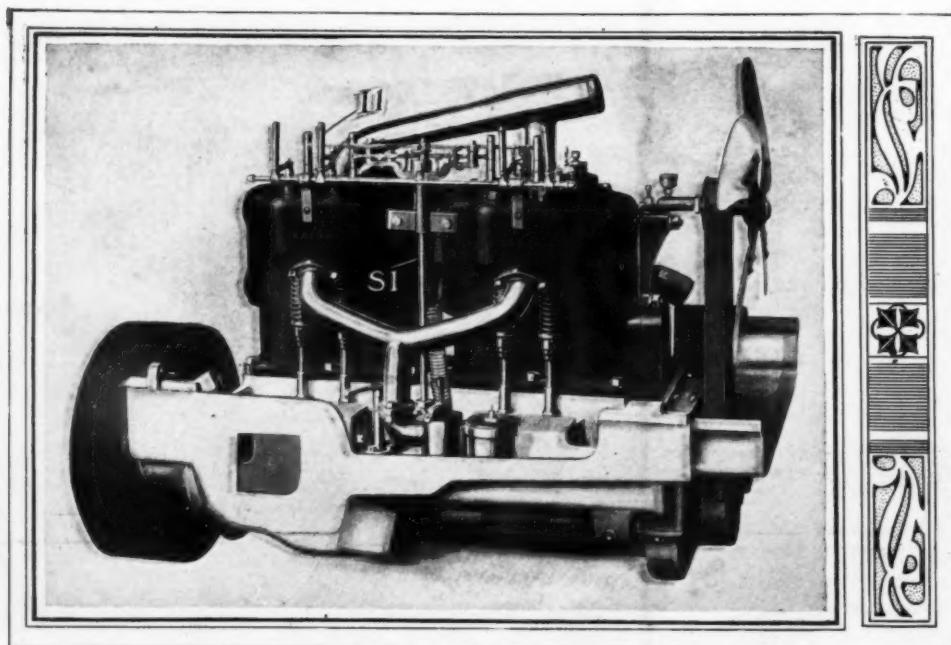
Make-and-break ignition system actuated by a vertical shaft
